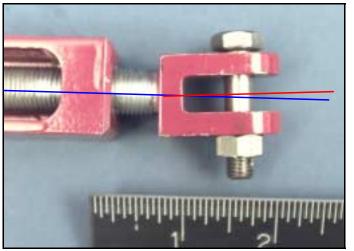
A typical right hand screw in the Boeing stabilizer fixtures.
